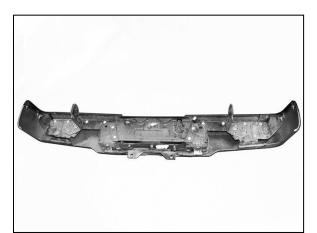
Remove factory bumper and double bolt plates. Do not remove support Brackets
